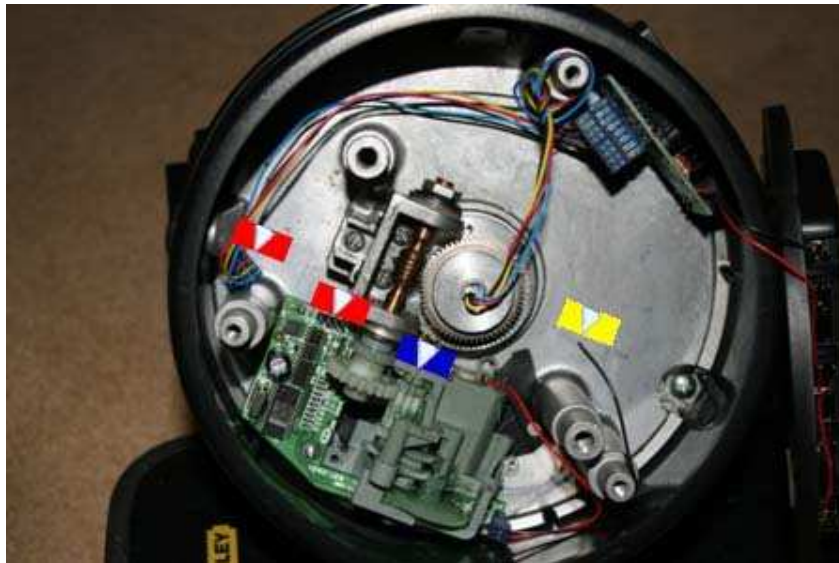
Interesting use of materials; a plastic gear assembly!
